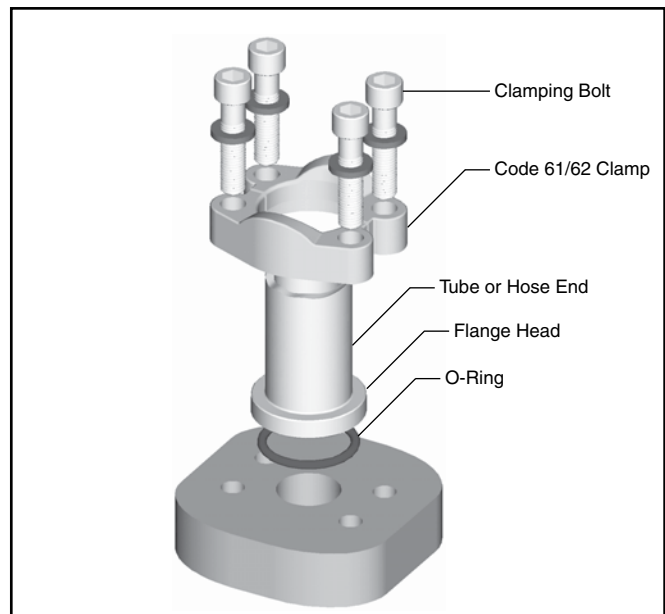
Four-Bolt Flange Connection (SAE J518)
